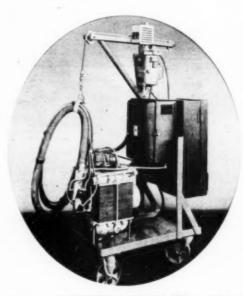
LOW PRESSURE WELDING GUN is available as postable unit complete with transformer and controls.
